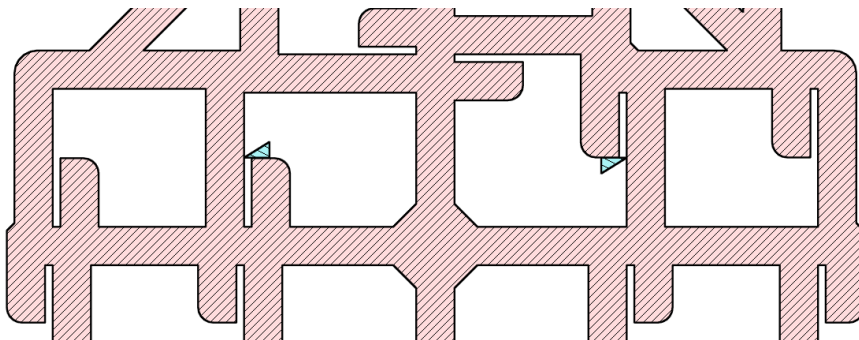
Cross section showing calliper position for a 50mm inner measurement.
